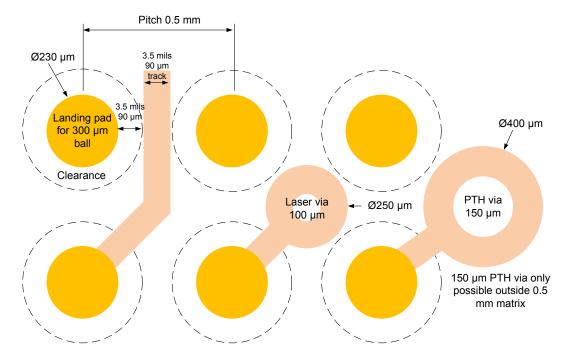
PCB rule example for 0.5 mm pitch package (with laser via and PTH)
